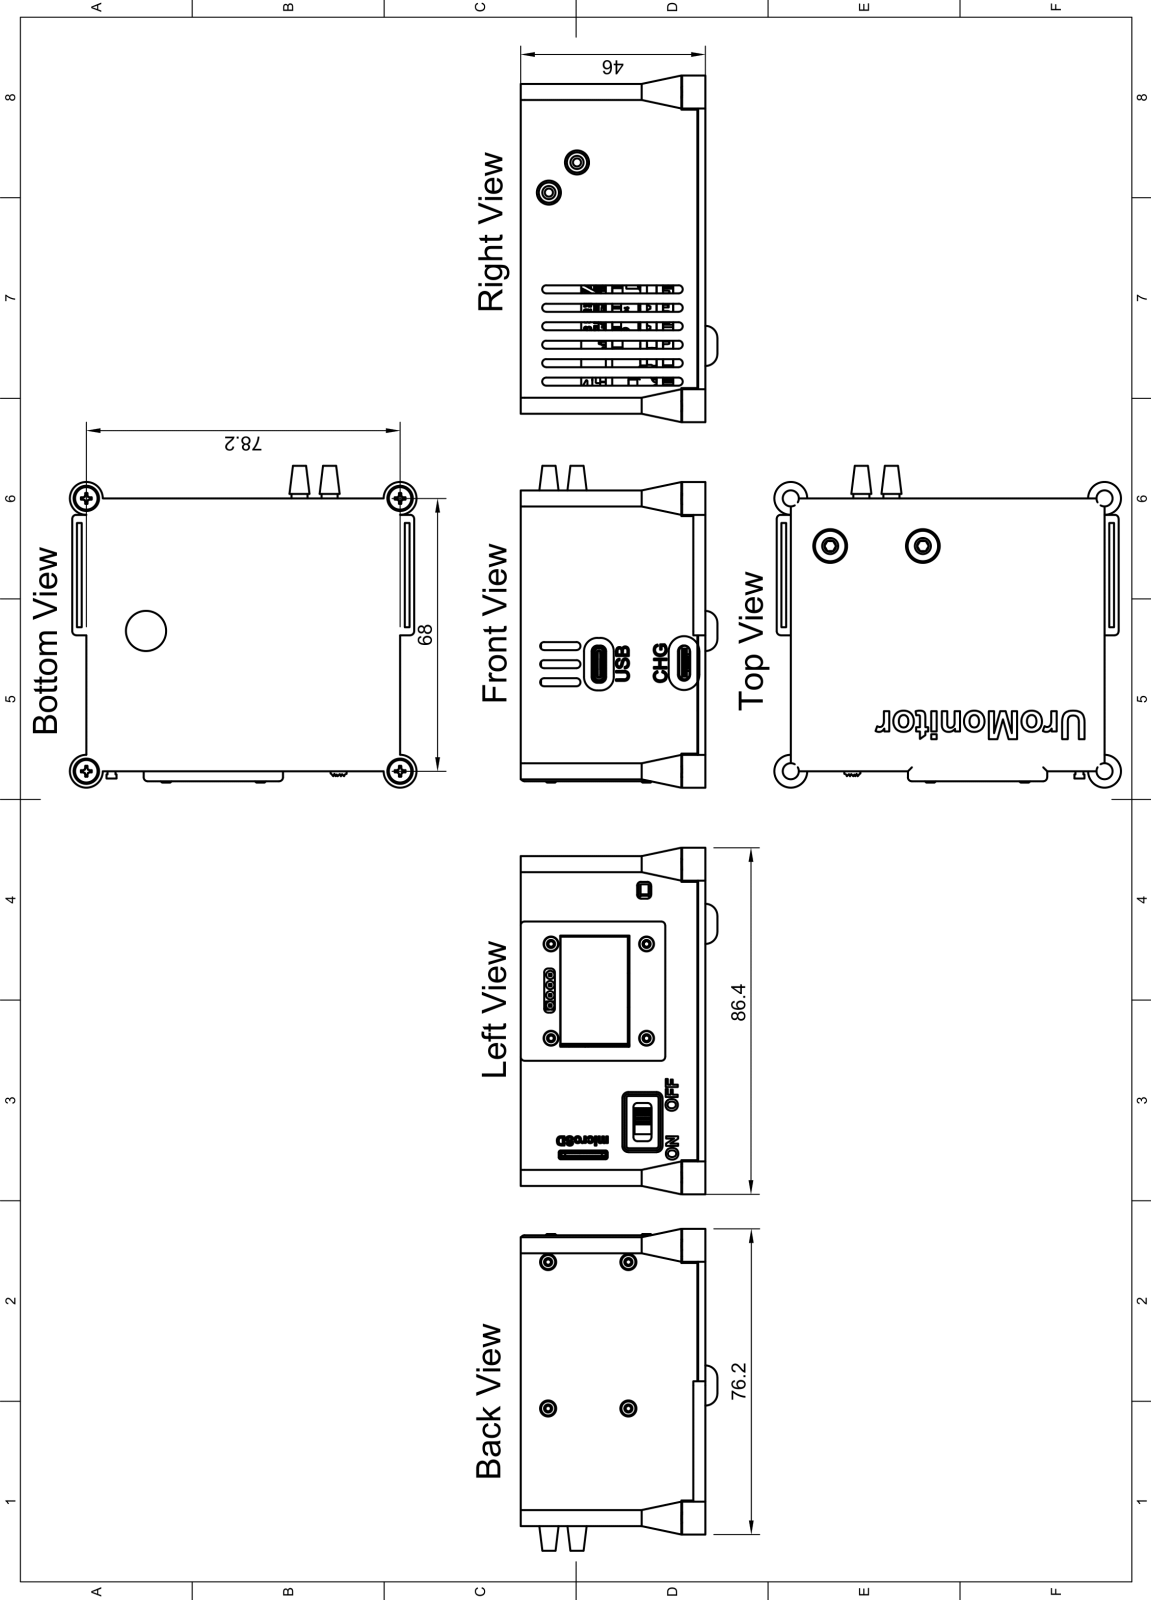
Orthographic drawings of the enclosure showing top, bottom, front, back and side views. Designed in Fusion360.
